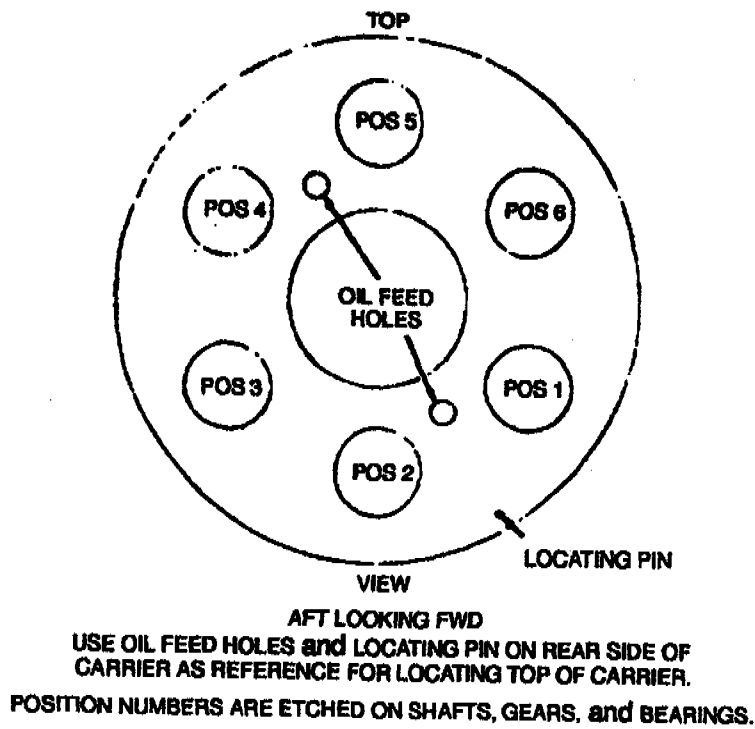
Positioning Planet Gear Assemblies - Secondary Carrier (T53-L-701, -701A).
